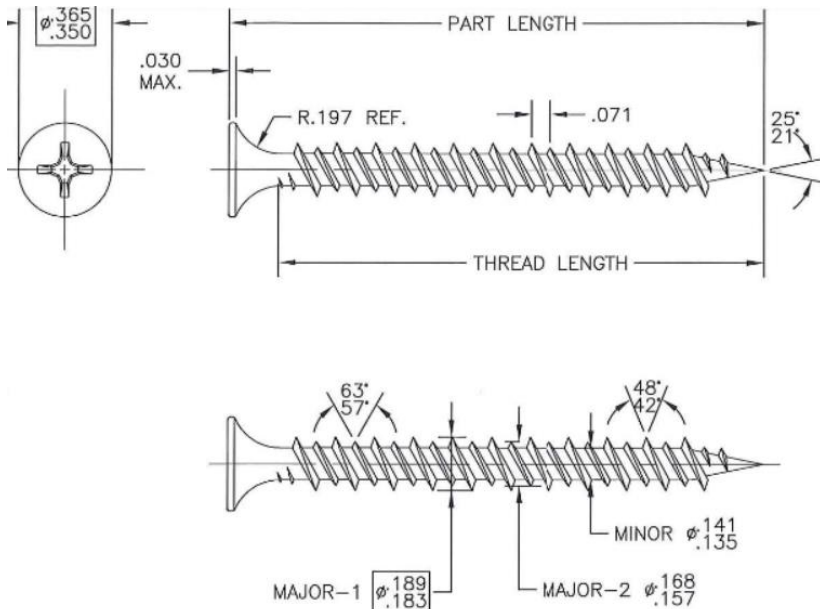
#10 wood screw to be used with TubeSeal™ in wood stud connections.
